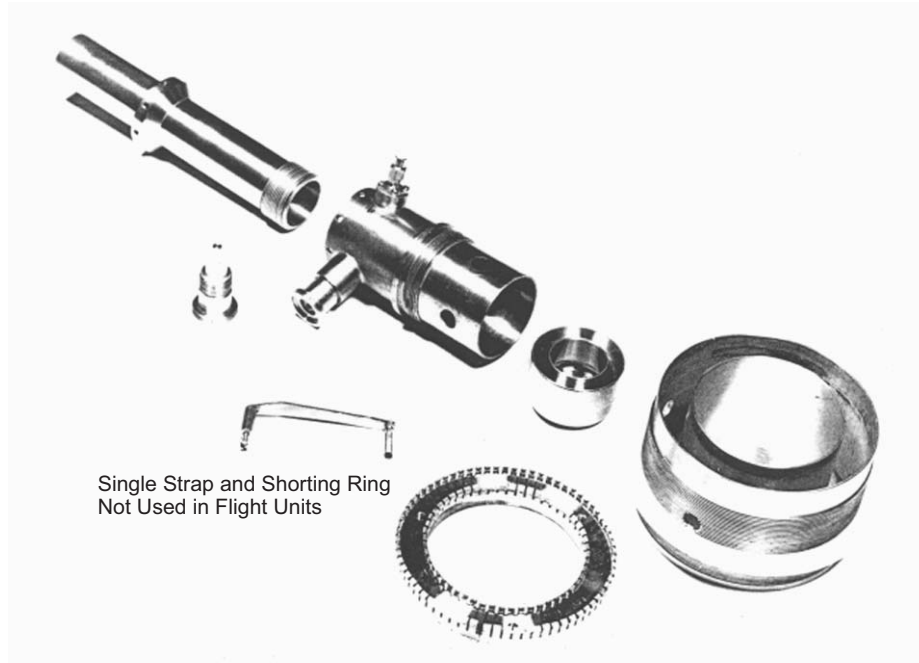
Mariner 10 HGA feed, exploded view.
